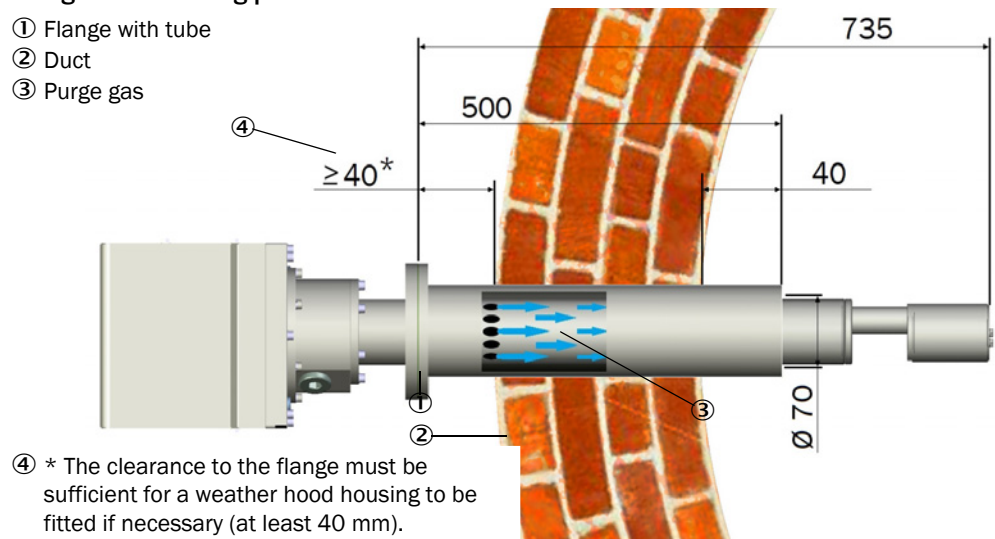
Fitting the flange with tube (all dimensions in mm)
